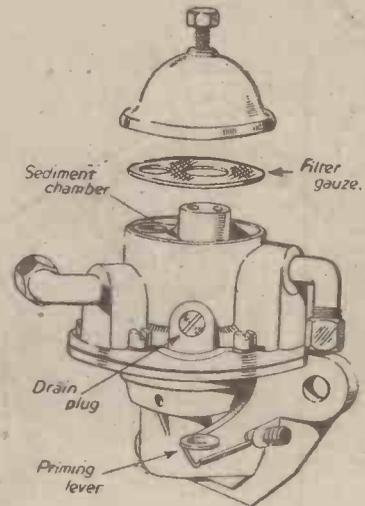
A mechanical fuel pump showing how the filter is reached for cleaning, and also the position of the drain plug for the sediment chamber.
